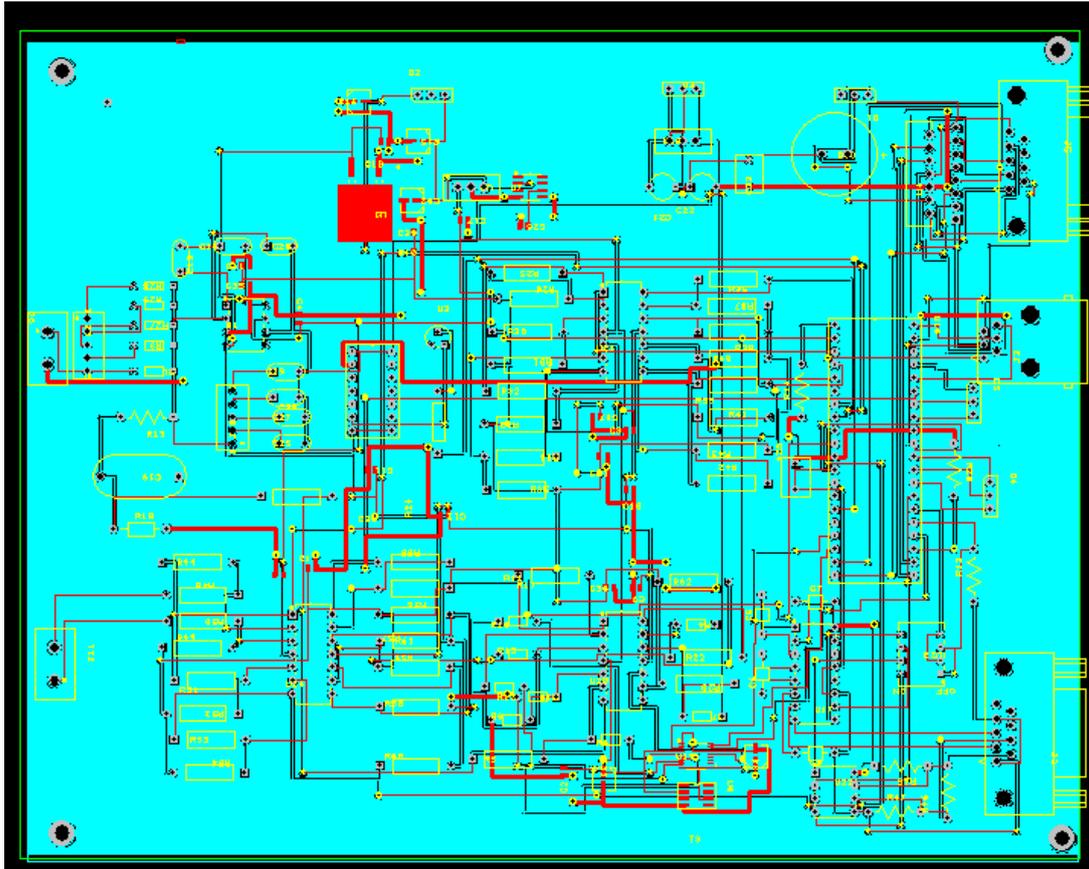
Manufactured PCB for the control unit of the prototype 3.
